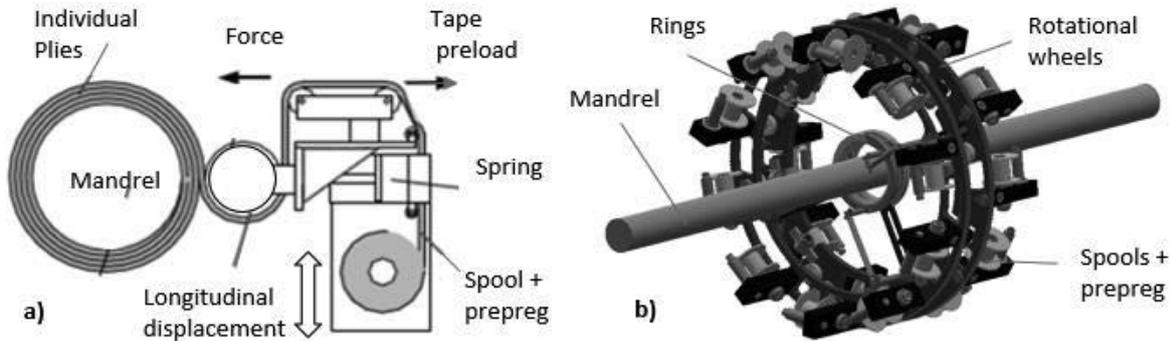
The used manufacturing methods a) Wrapping b) Winding
